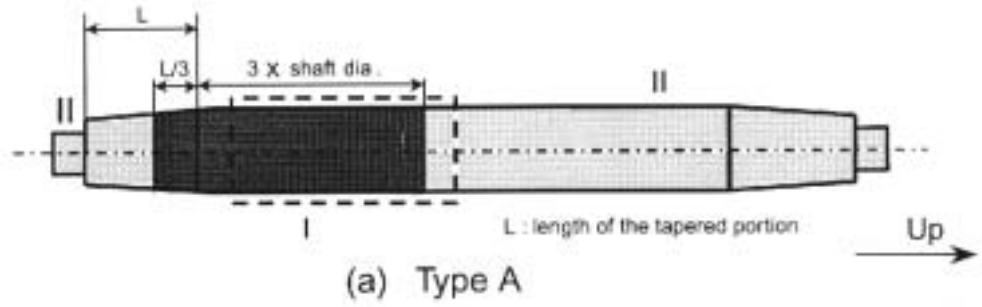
Zones for magnetic particle / liquid penetrant testing on machinery components
